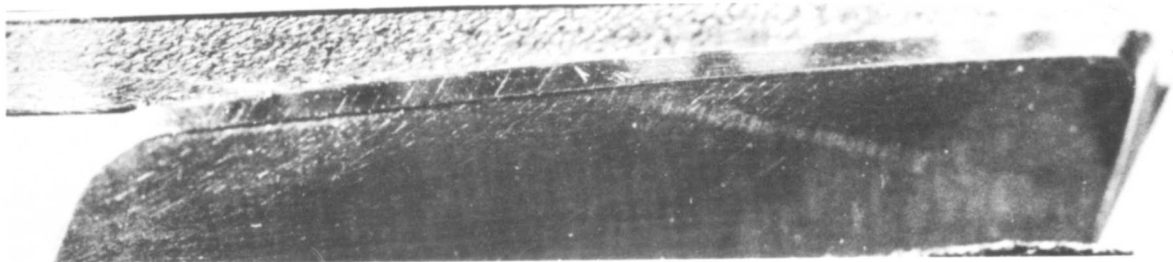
SK22032, Serial No. XC102, 9-Pitch, High-Contact-Ratio Helical Gear as Received
